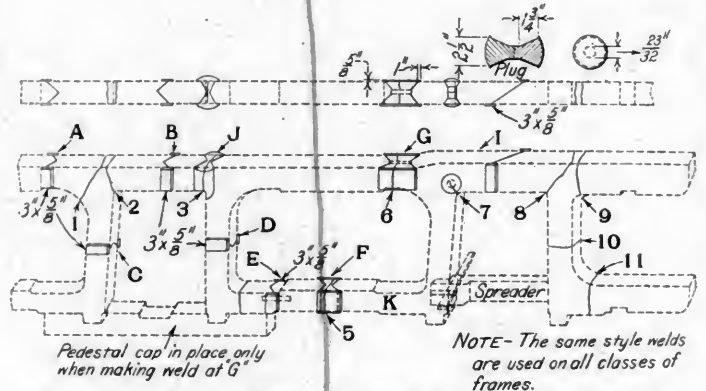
Method of Making Oil Welds in a Locomotive Frame
